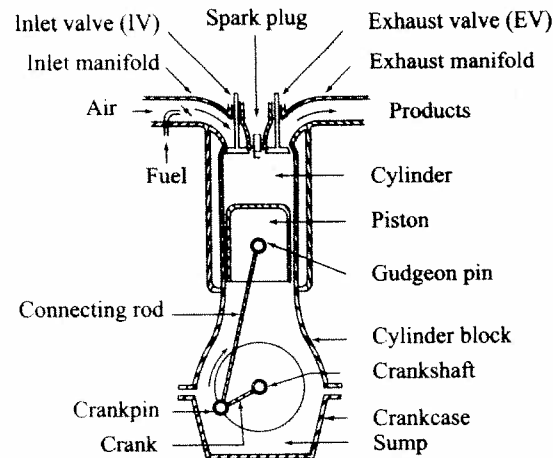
Cross-section of a Spark-Ignition Engine
